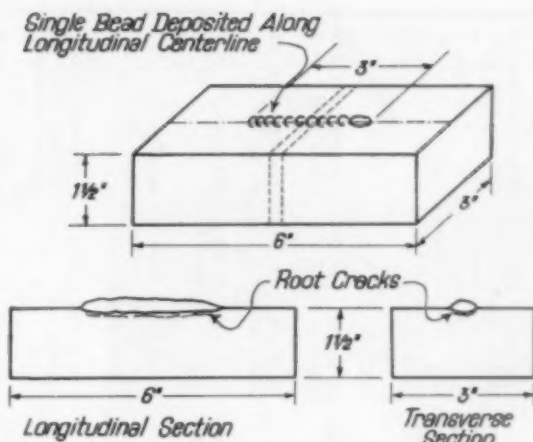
Test Piece for Weld Bead Hardness; Dotted Lines on Perspective Sketch Represent Slice for Crack Inspection
